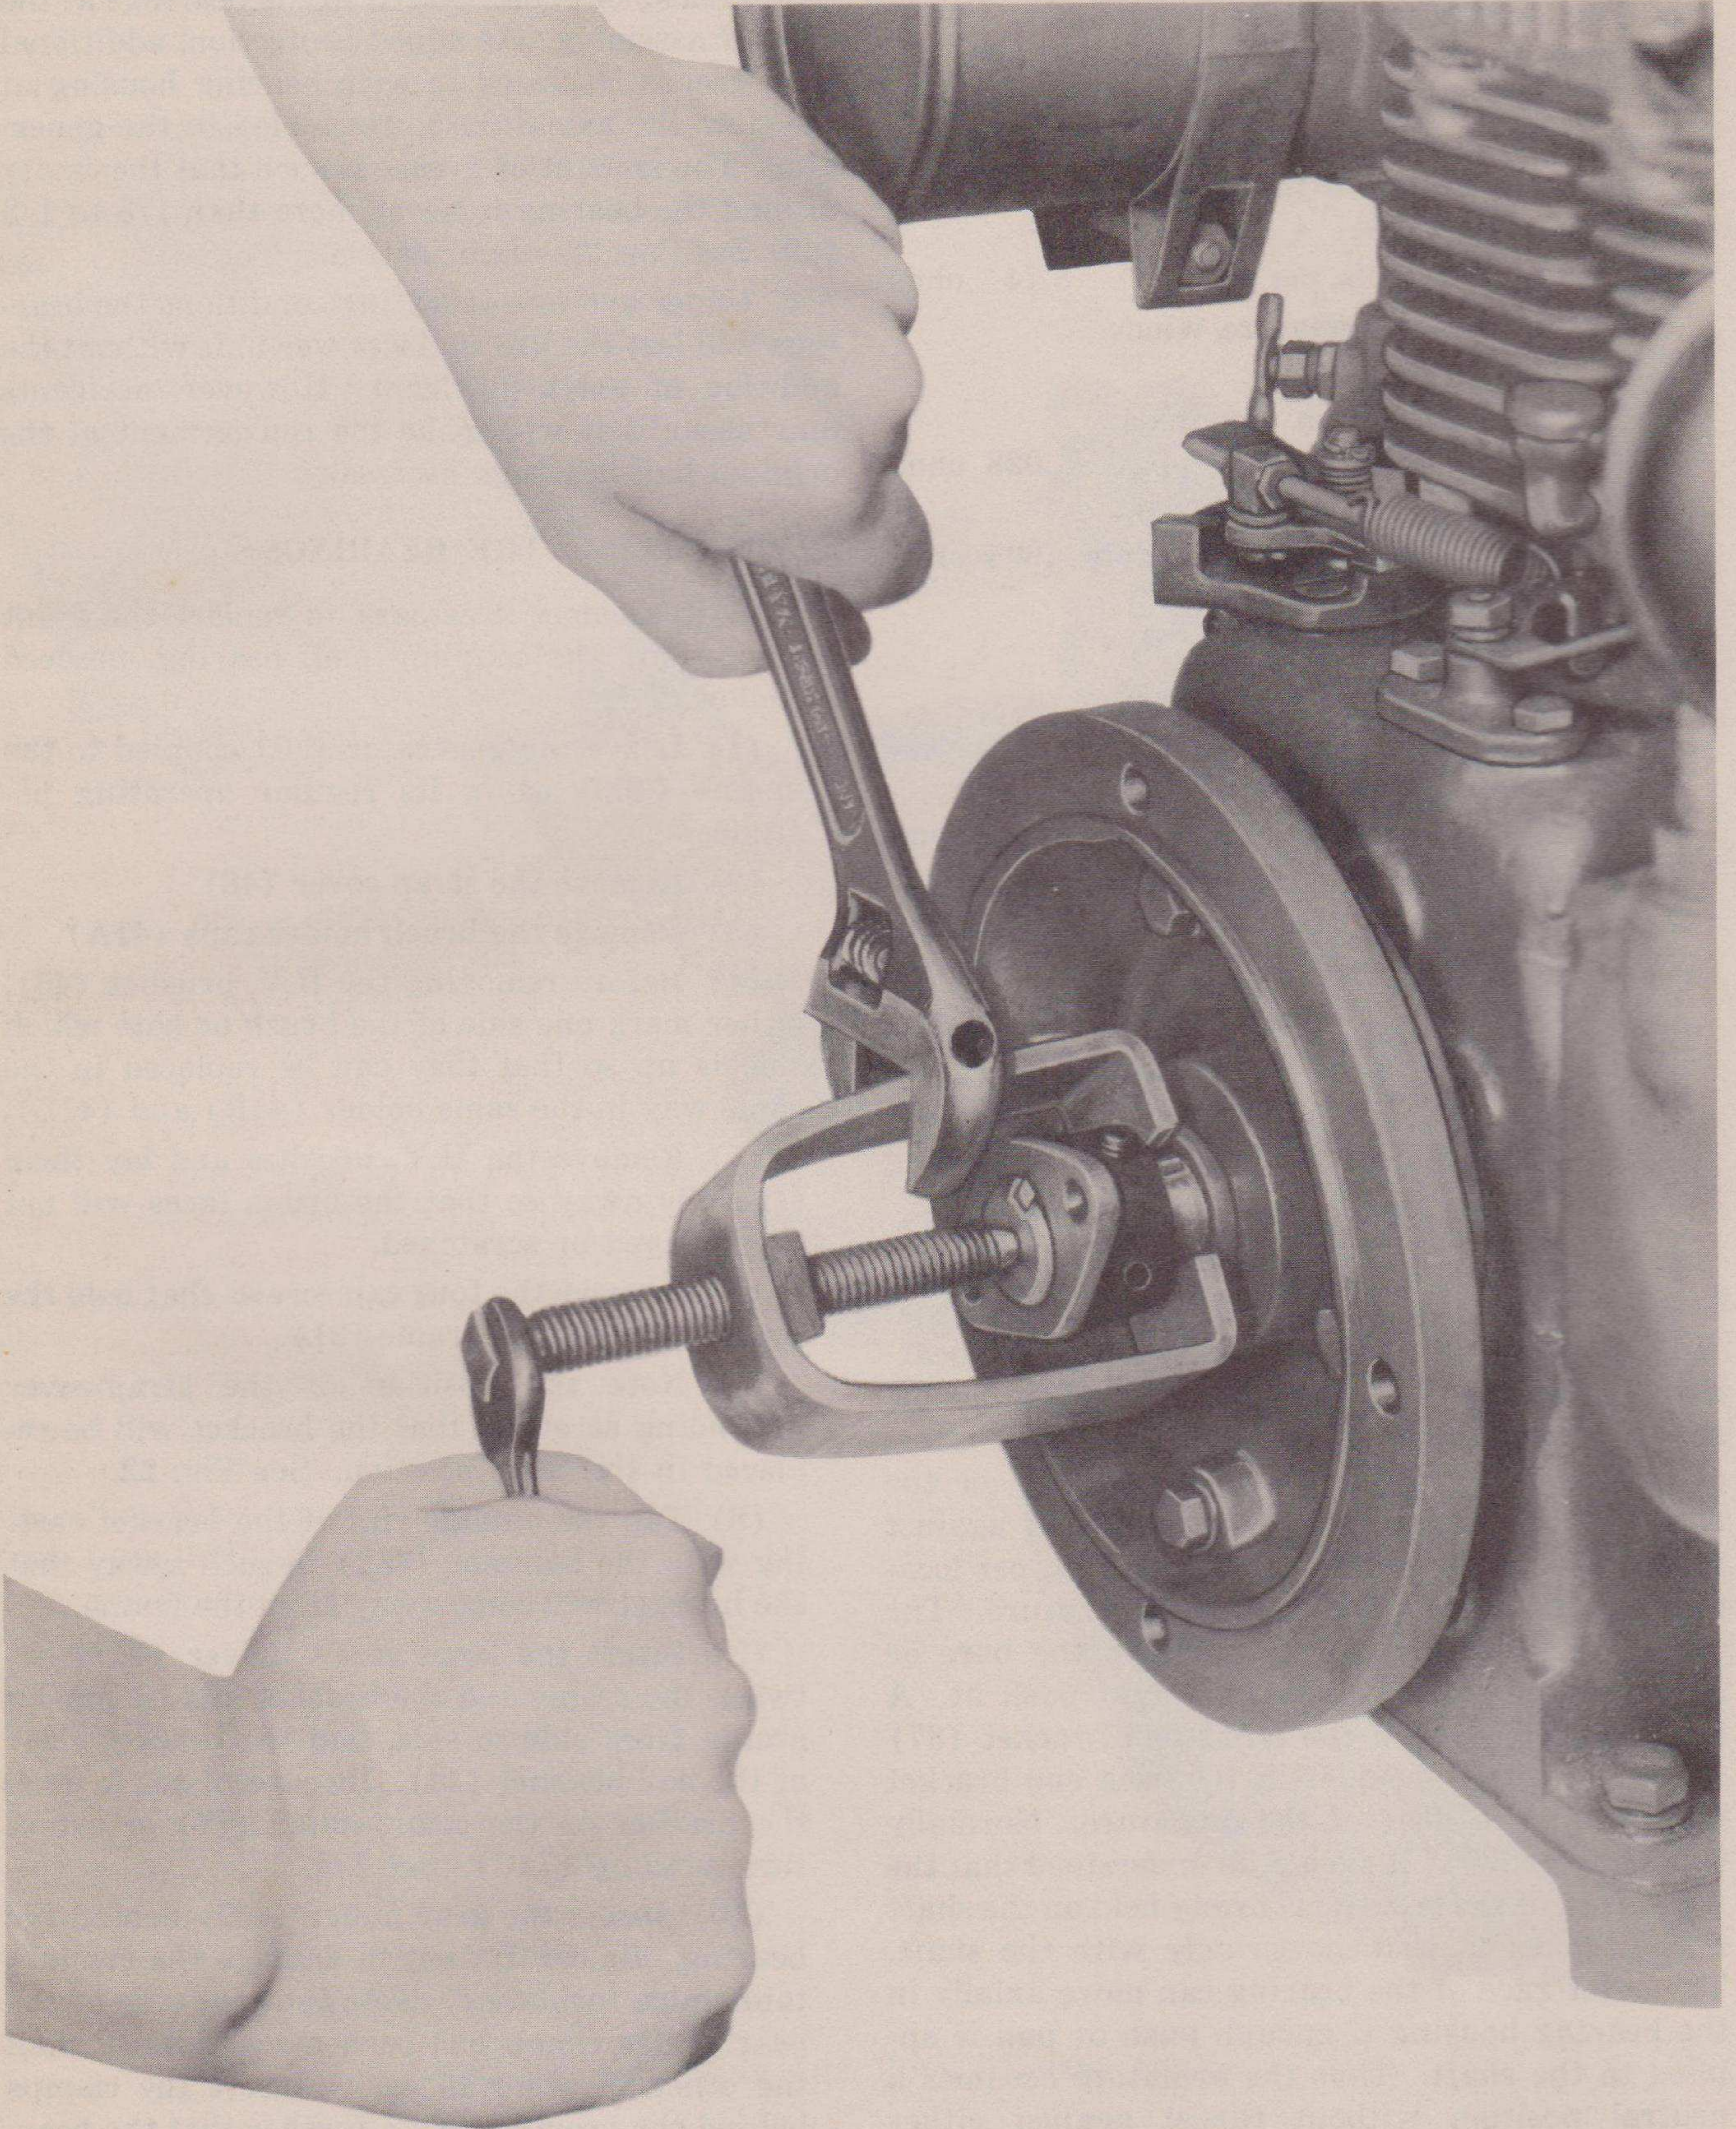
REMOVING THE ENGINE COUPLING HUB
